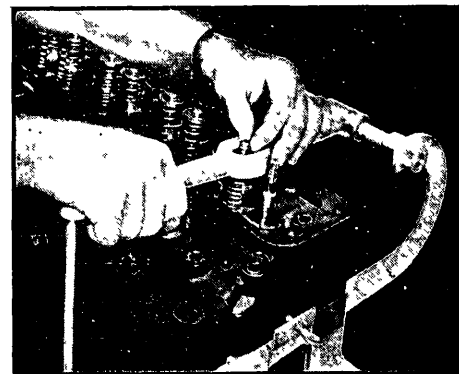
Removing valve keepers with the aid of special cylinder head holding tool. 1951-52 V8 engine
